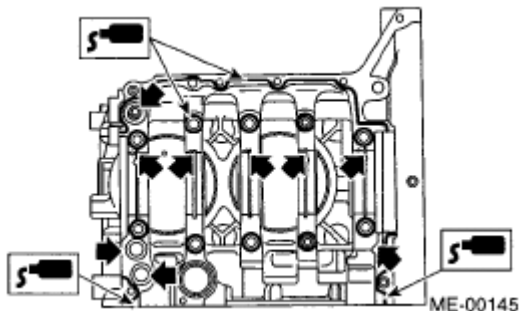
Applying Liquid Gasket To Mating Surfaces Of Cylinder Block
